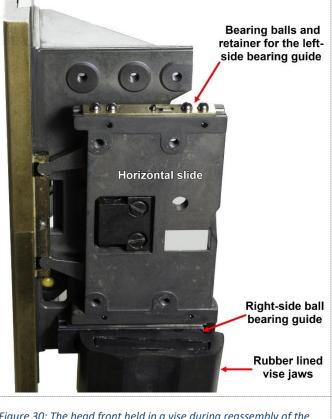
The head front held in a vise during reassembly of the horizontal slide with its ball bearings.
